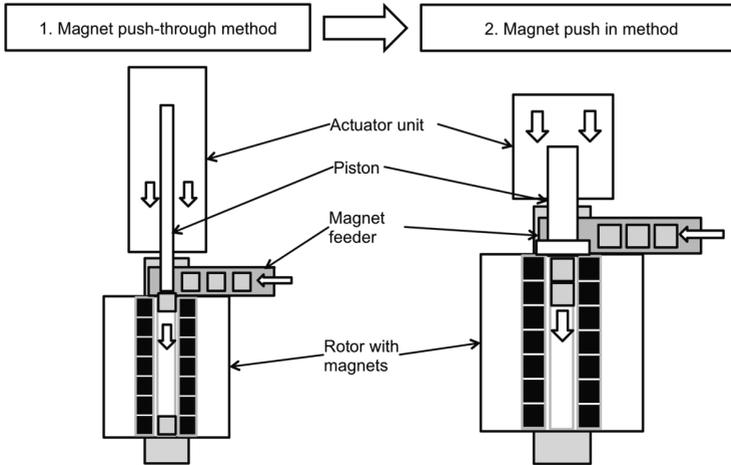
Changing from pushing the magnet-through to push-in assembly improves the magnet insertion method.
